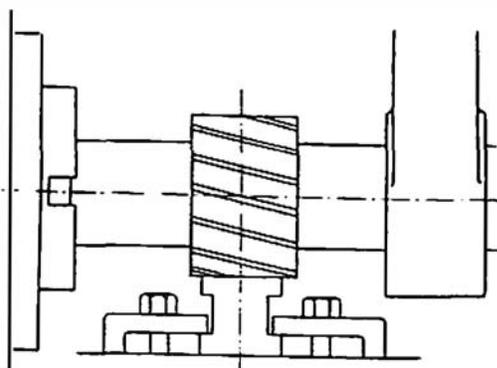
A. Performance Test on Milling Machine—Slab Milling
